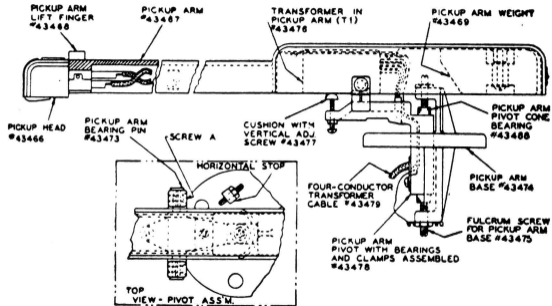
Side view of the pickup arm assembly. The insert shows the top view of the pivot assembly.
